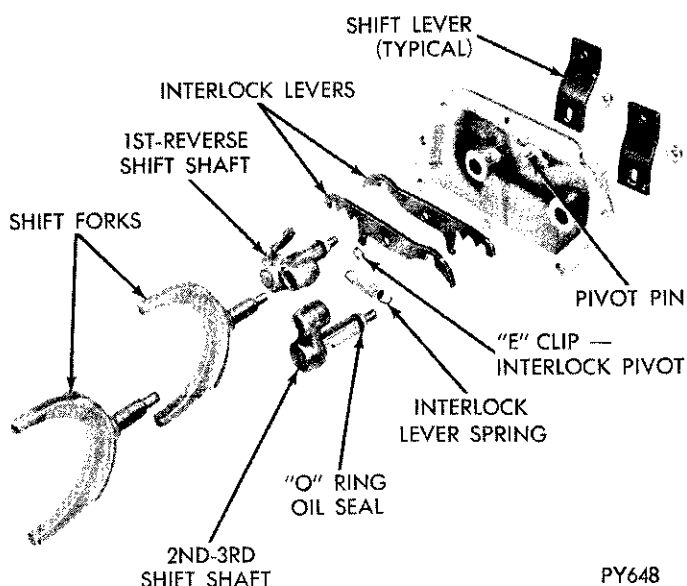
Gearshift Mechanism and Housing—Disassembled
